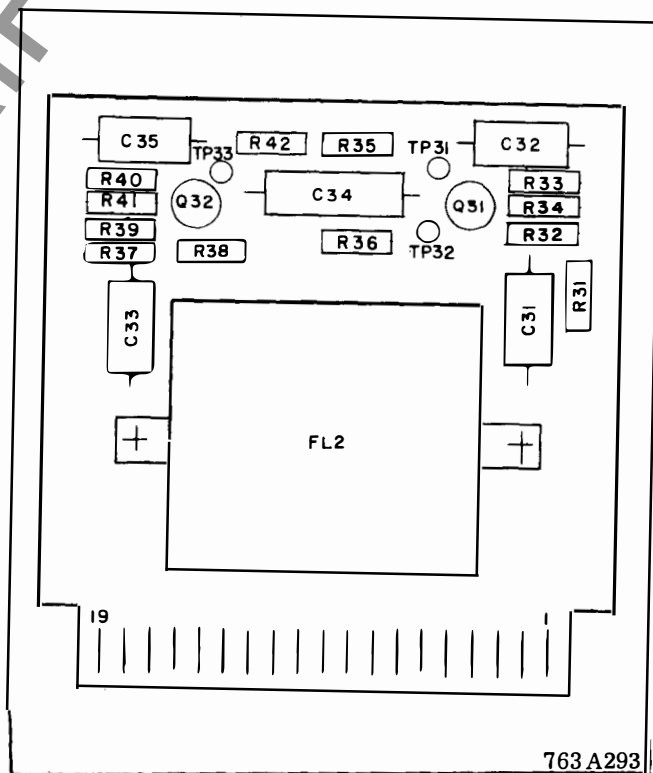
Component locations on I.F. amplifier printed circuit board.
